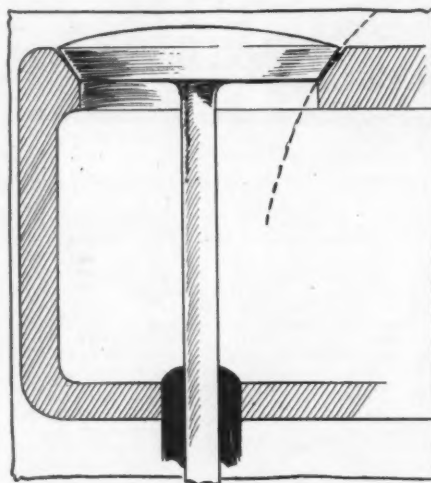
HOW GAS LEAKS BY PITTED VALVE
